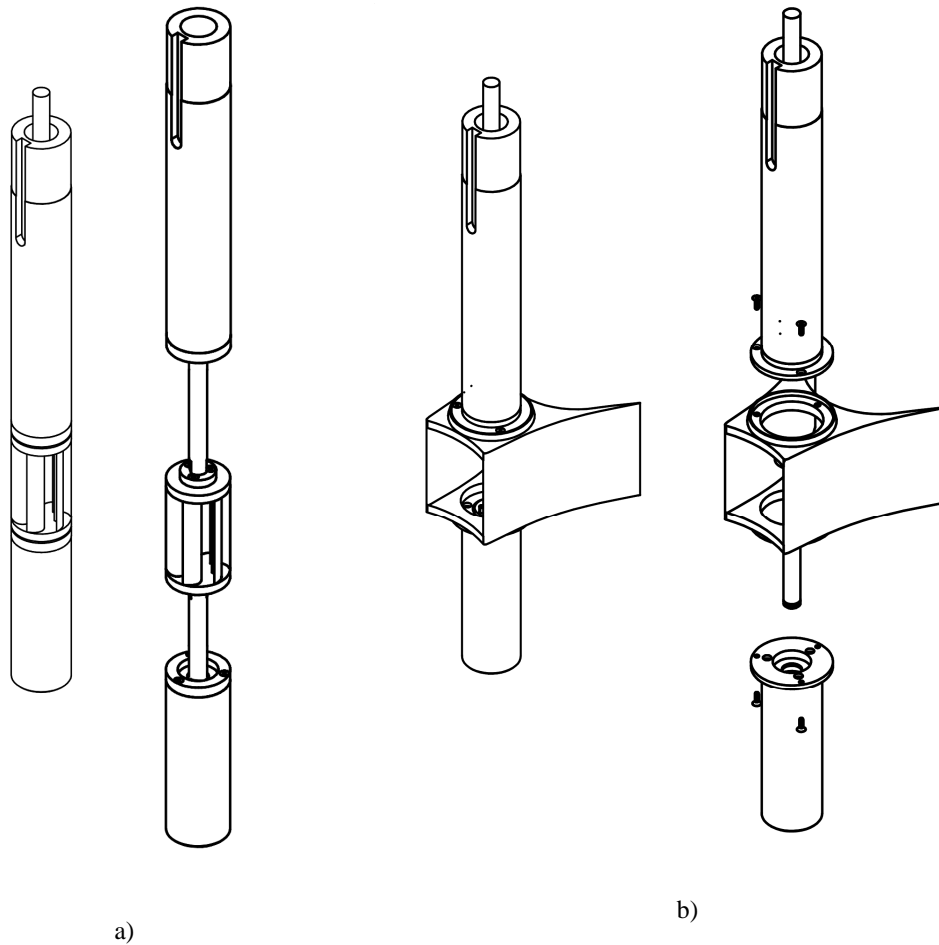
The 3D schematic of the sleeves with a) rotating shaft, b) diffuser
